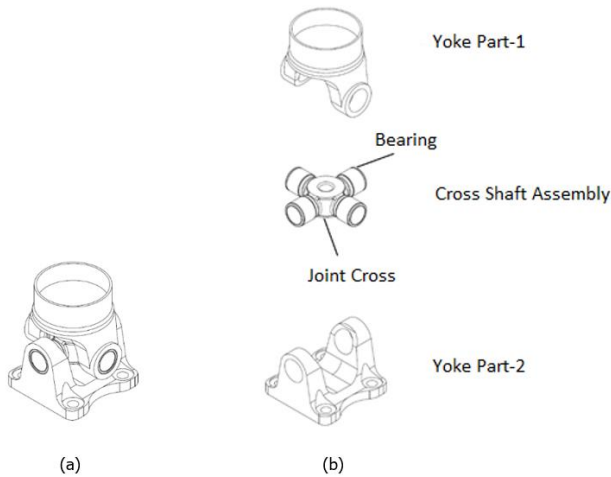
A typical universal joint: a) assembled view, b) exploded view.
